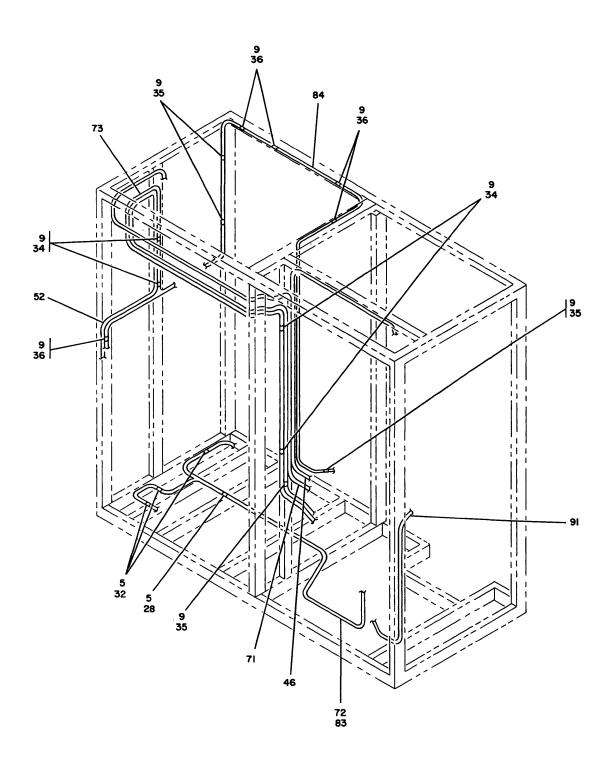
FINAL ASSEMBLY-2804. SHEET 2 OF 3. SEE LIST 18.
